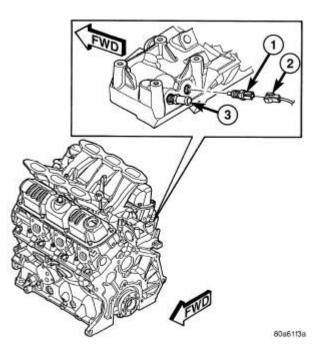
Identifying Heater Supply Hose, Engine Coolant Temperature (ECT) Sensor, & ECT Electrical Connector Courtesy of CHRYSLER LLC
